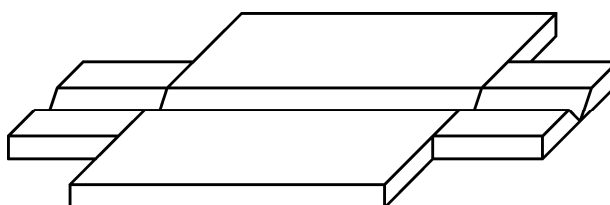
Example of run-on and run-off plates for butt welds
